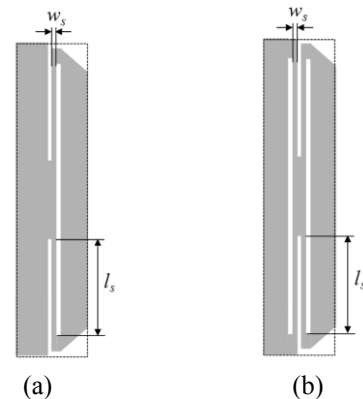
Torsional spring: (a) I-type spring; (b) H-type spring
